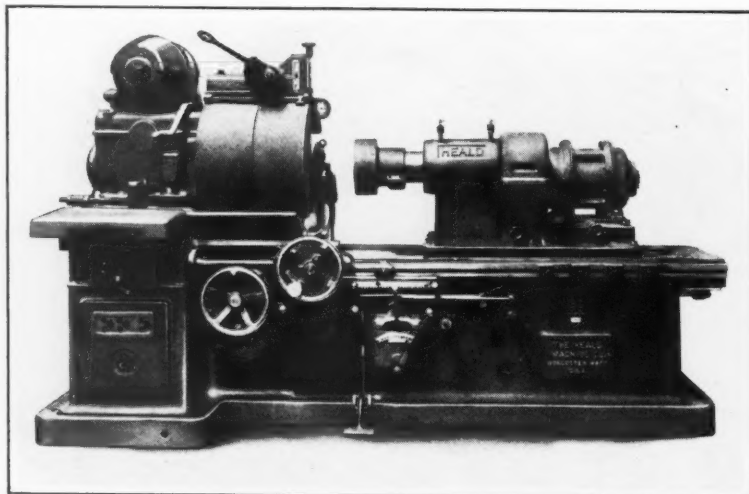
Heald Heavy-duty Internal Grinding Machine which Weighs Approximately Nine Tons
